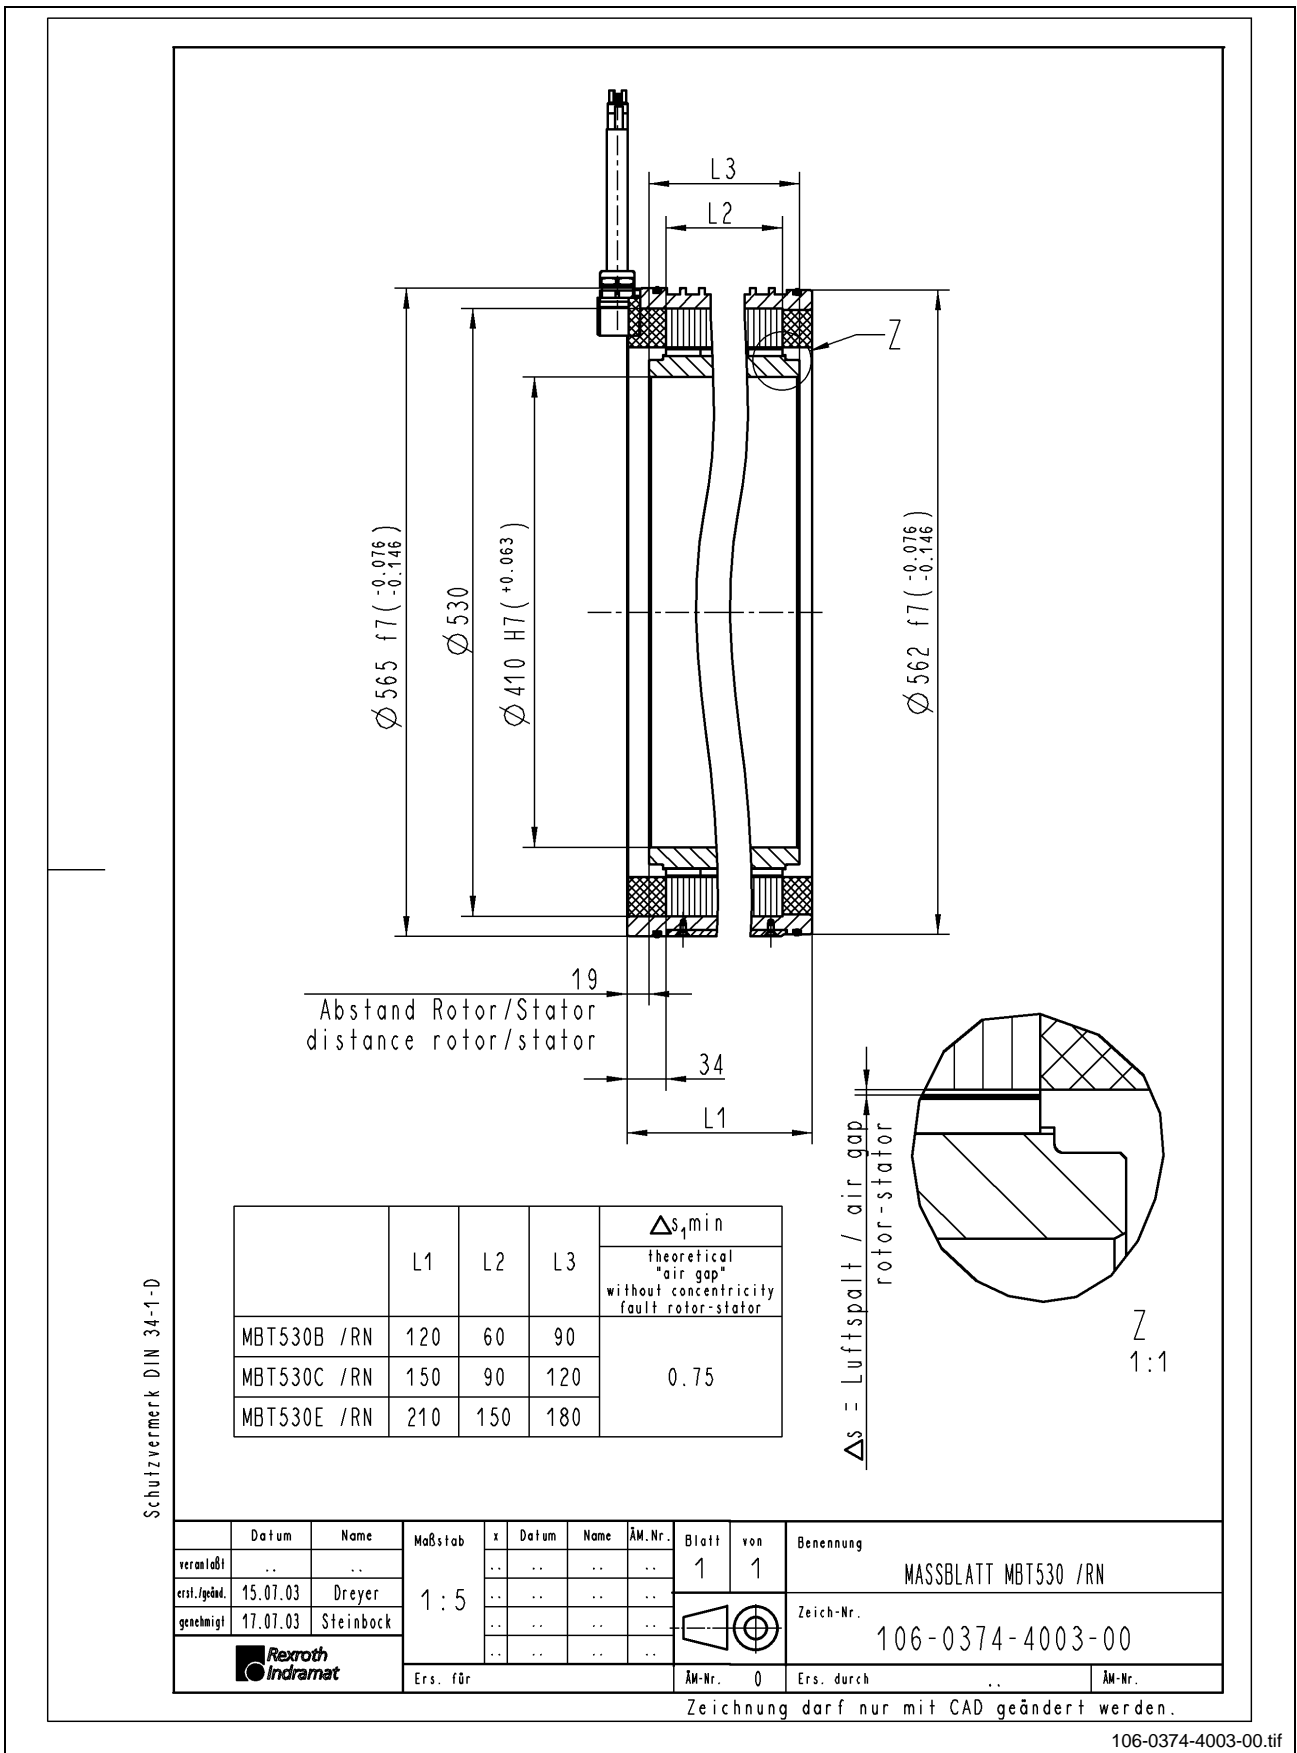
Dimension sheet size 530, electrical connection "RN"
